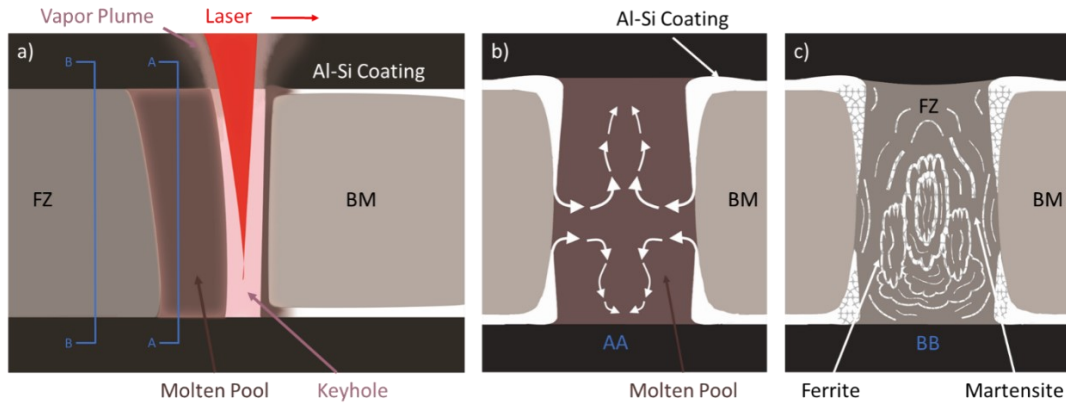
Schematic showing (a) the laser welding of Al-Si coated 22MnB5 steel with a cross-section of (b) the molten weld pool showing the mixing pattern of the Al-Si coating and (c) the solidified FZ showing the dual-phase microstructure with ferrite dispersed in a martensitic matrix [25].
